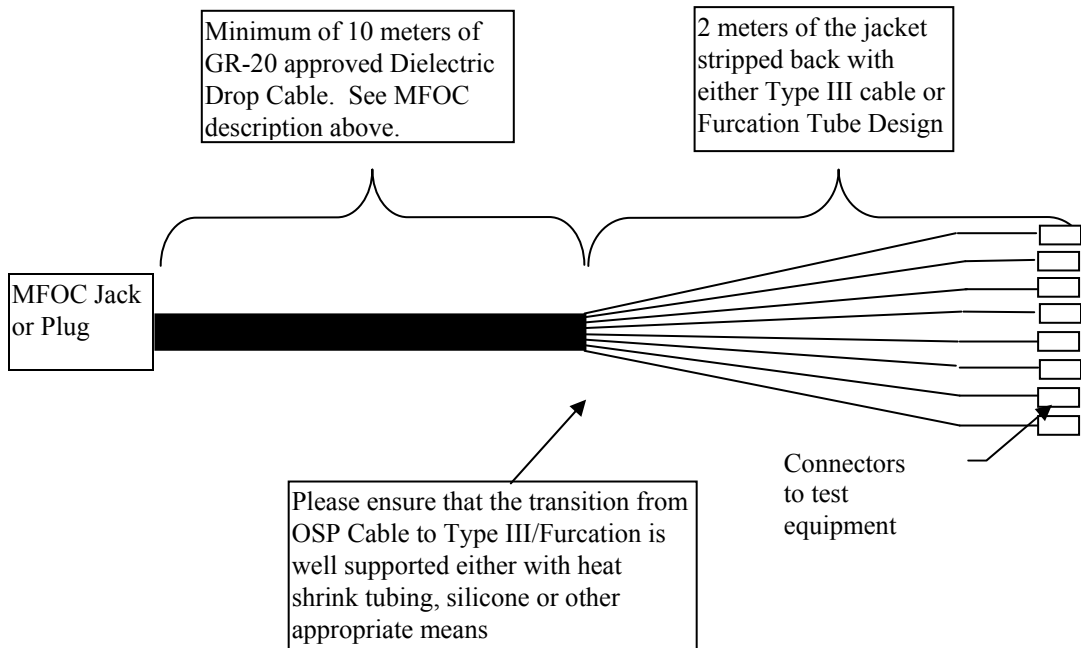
Required Configuration of MFOC Jumper Cable Assemblies
